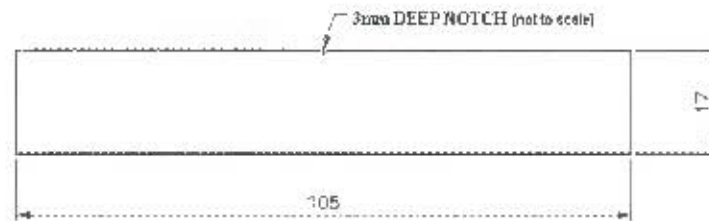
(b): Dimension for the fracture toughness SENB specimen for the 2030 T3.
